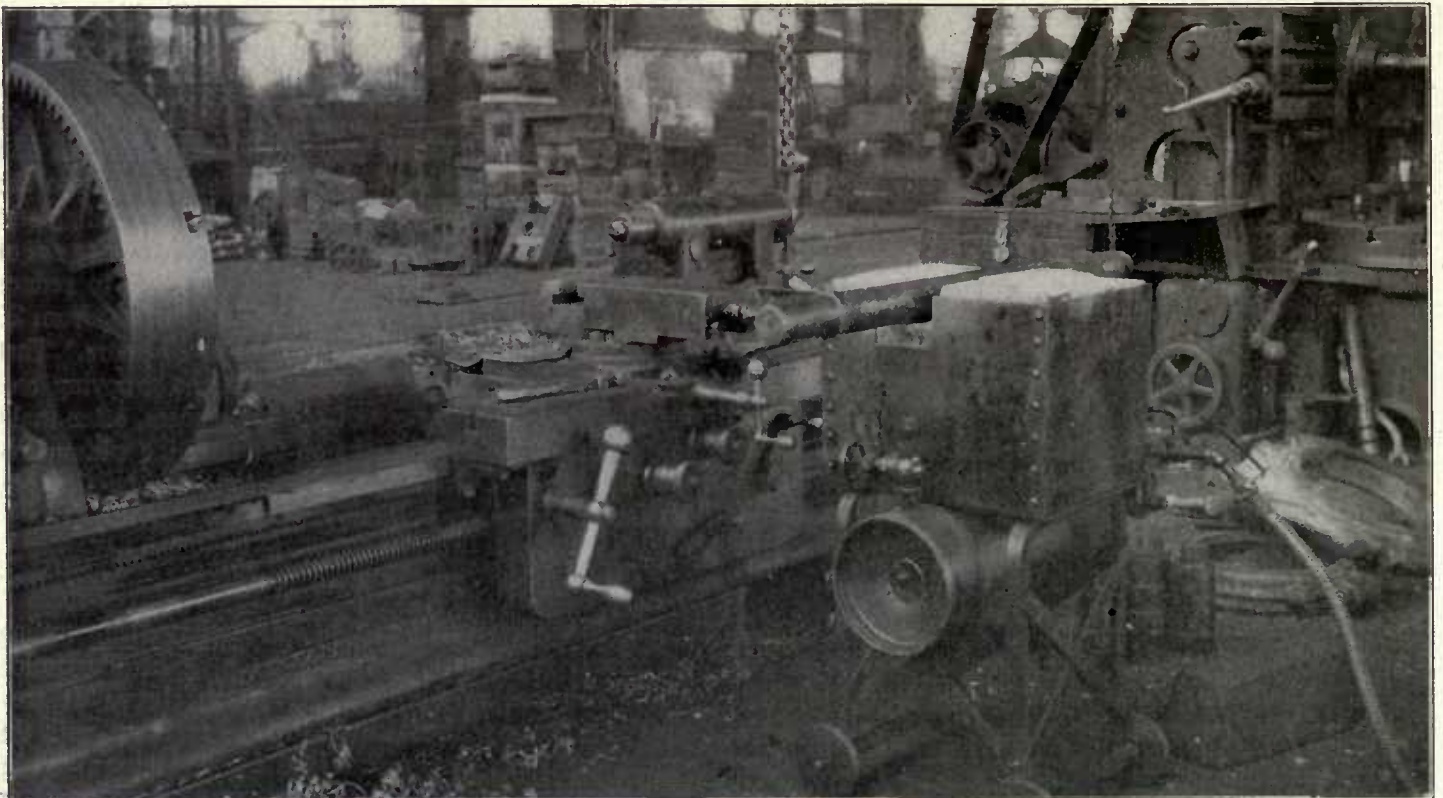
Oil Furnace for Heating Piston Rods Preparatory to Straightening Them in Lathe Centers.
